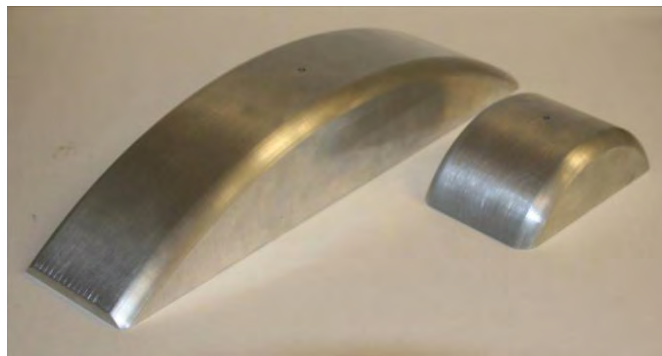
12 in. and 3 in. Radius "Rigid" Indentors for Stringer Specimen Tests
